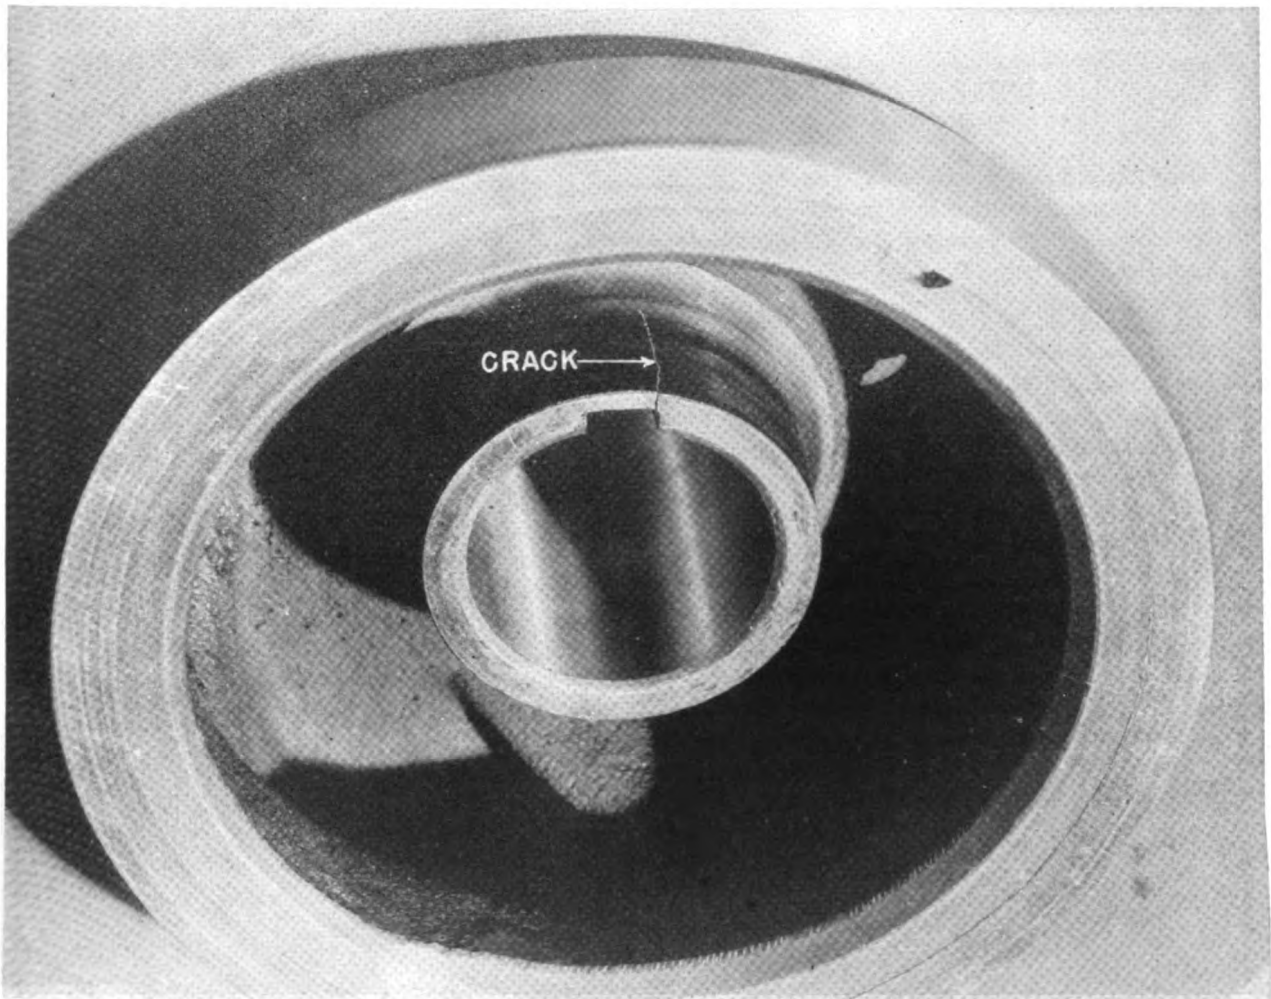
Cracked keyway in water pump impeller.
